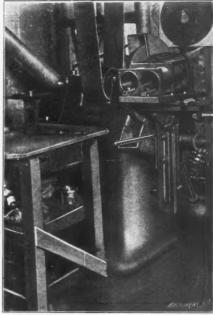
Finishing Seats for Water Jacket Cover on a Besly Disk Grinder
